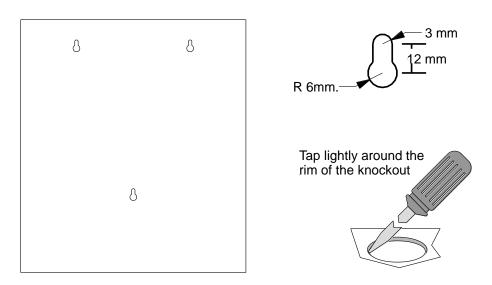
Example SP1X Back Pan Mounting Hole & Removing Knockouts
